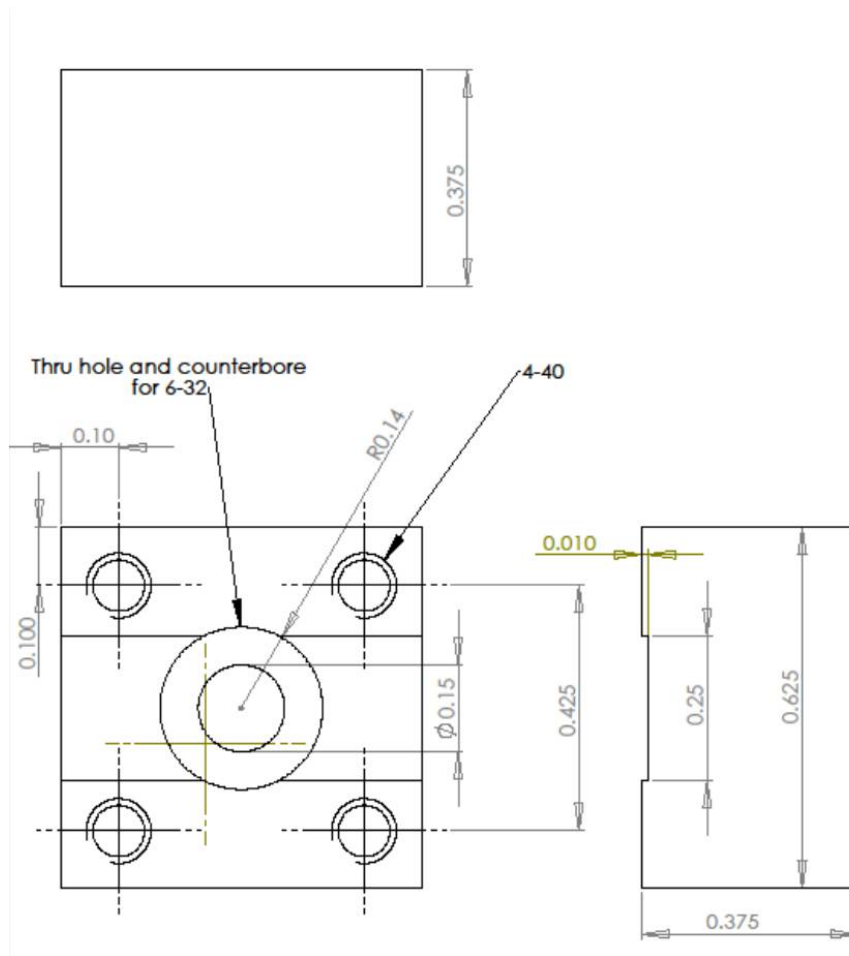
Schematic for bottom of C-F Fixture. Dimensions in inches.
